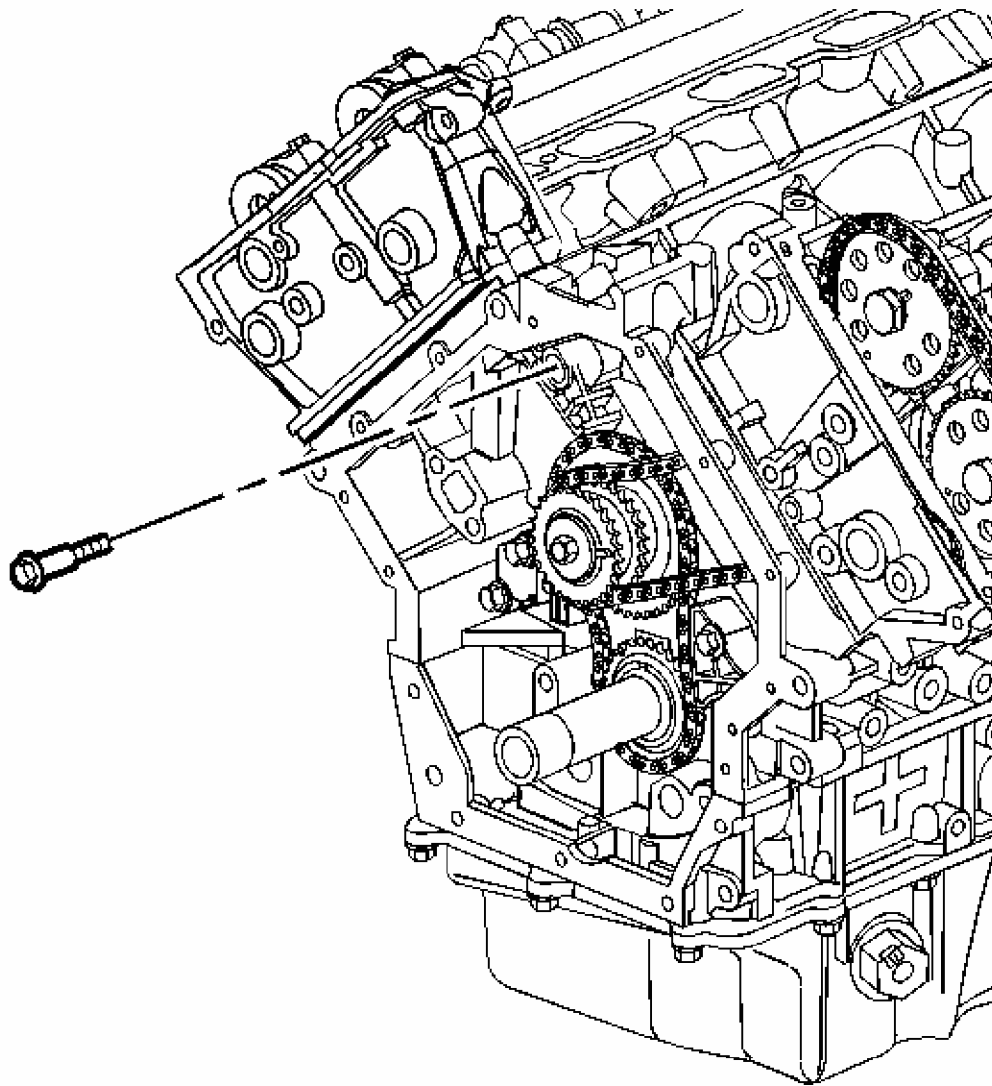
Identifying Lower Right Secondary Camshaft Drive Chain Guide Bolt
